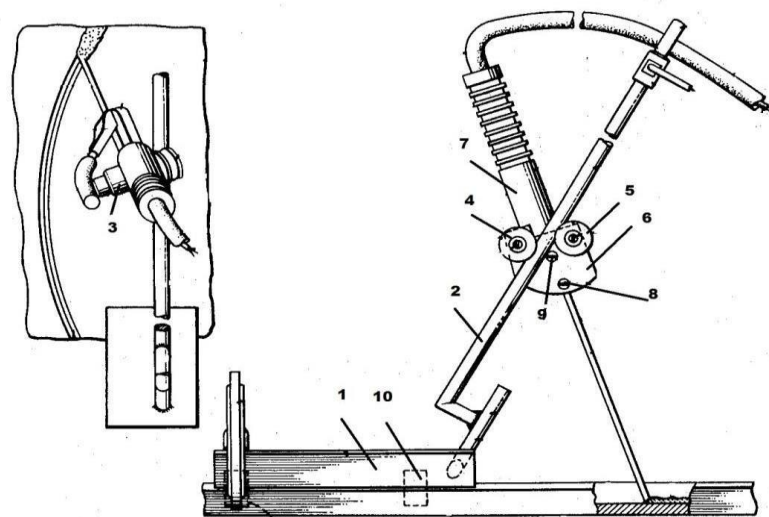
design Appearance of the unit for gravity welding of curved welds
